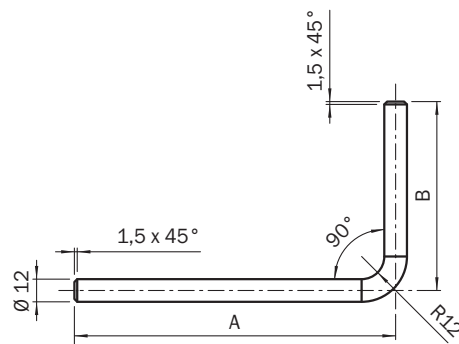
Mounting rod, L-shaped, all dimensions in mm
